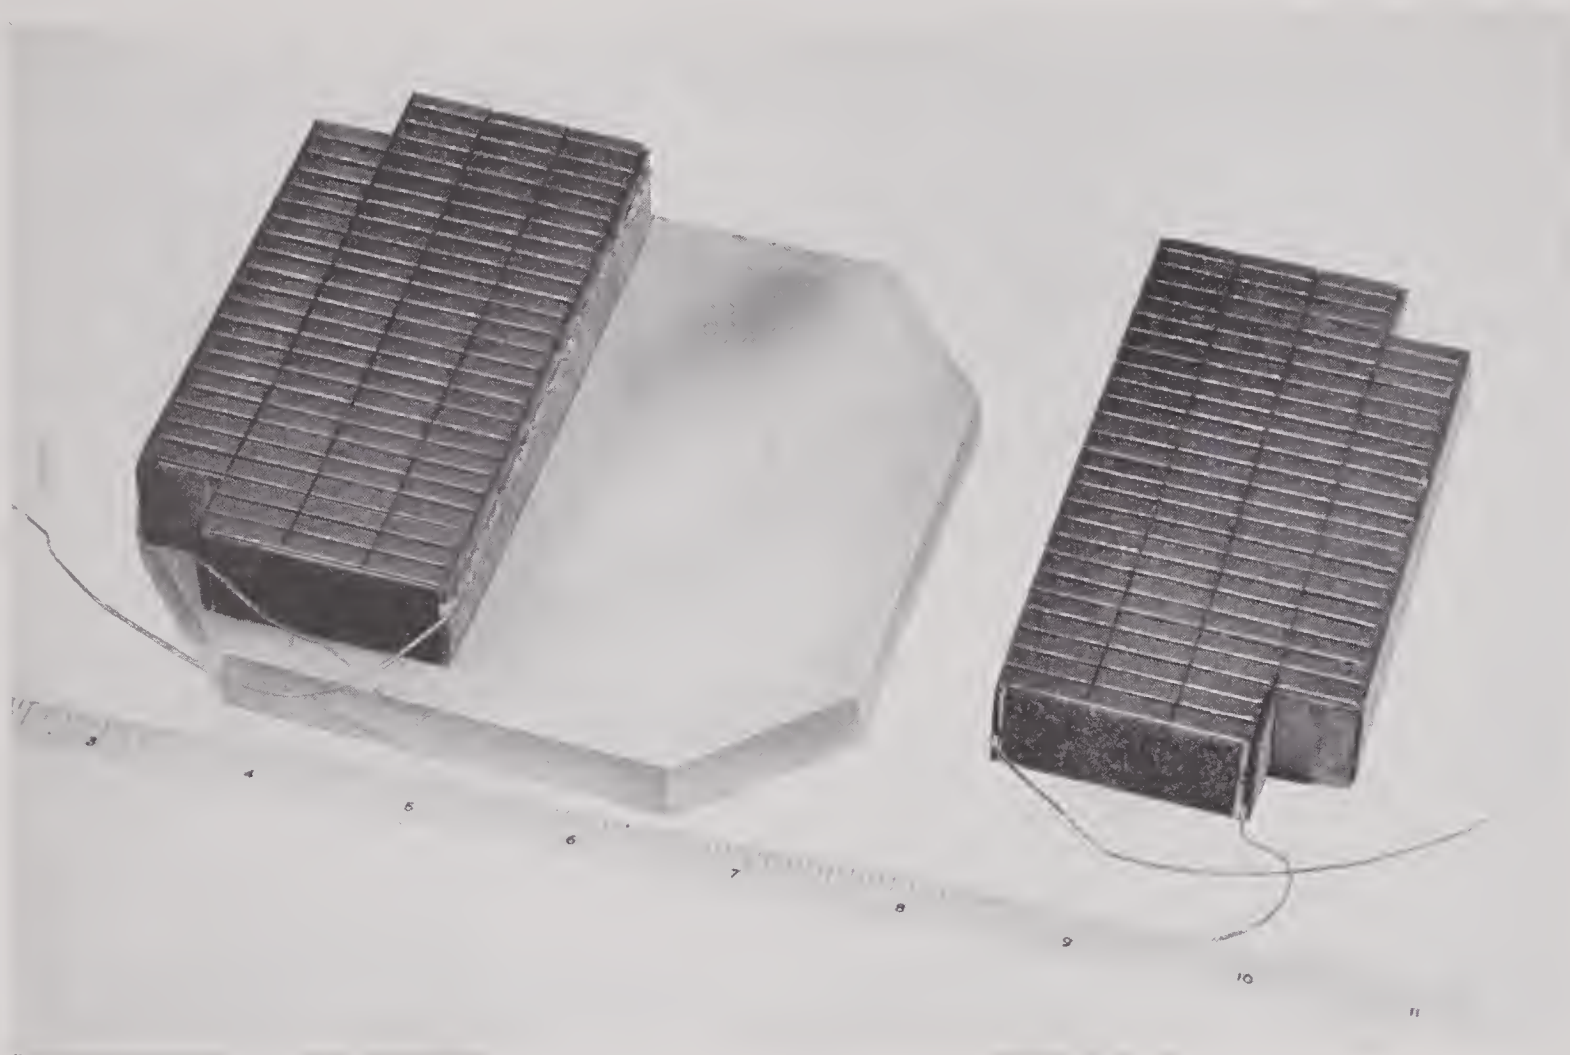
The partly assembled motor of the Brush Development Company AX124 transducer. The crystal array is built in two sections, with pressure-release material separating and surrounding each block of crystals, and then cemented to a glass backing plate.
